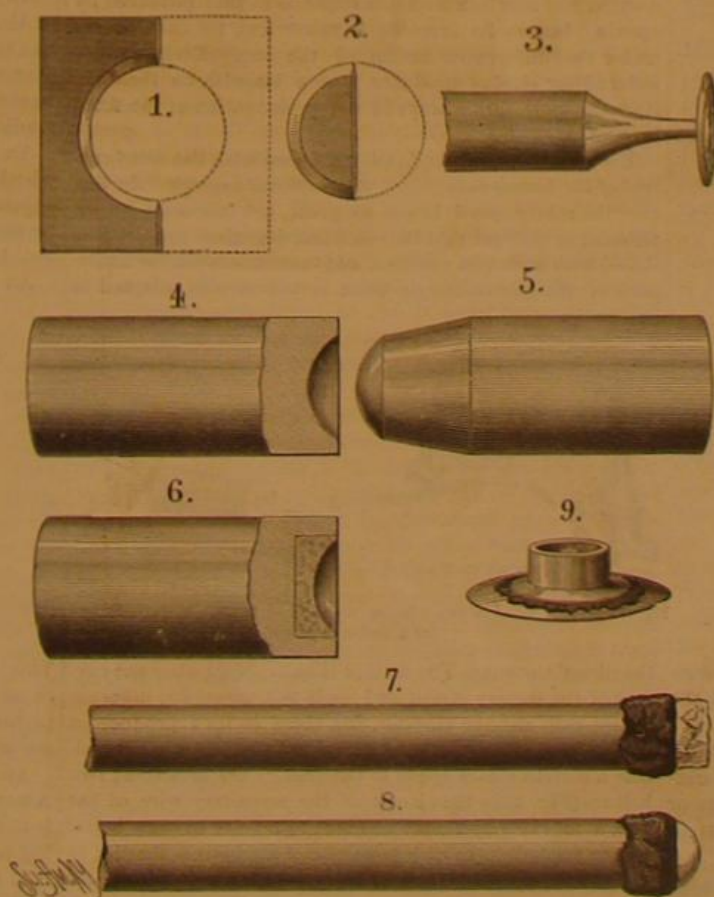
LENS GRINDING ATTACHMENT FOR FOOT LATHES.
